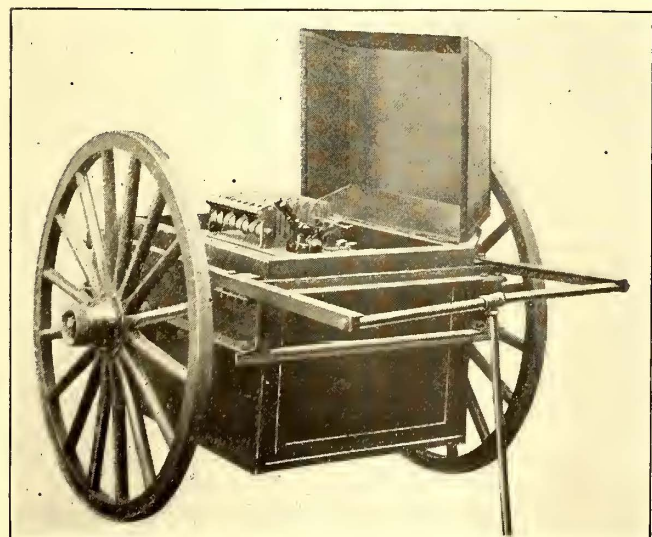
GENERATOR FOR USE IN MAKING ELECTRIC ARC WELDS
